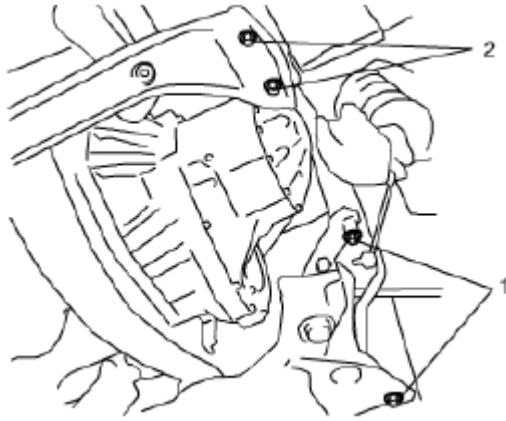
Identifying Suspension Frame Mounting & Front Lower Cross Member Bolts
